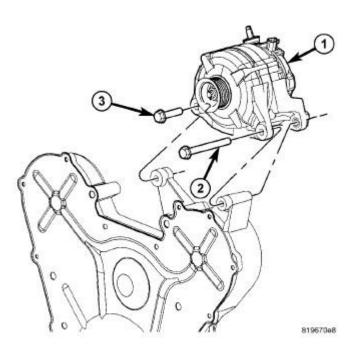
Generator & Mounting Bolts Courtesy of CHRYSLER LLC
